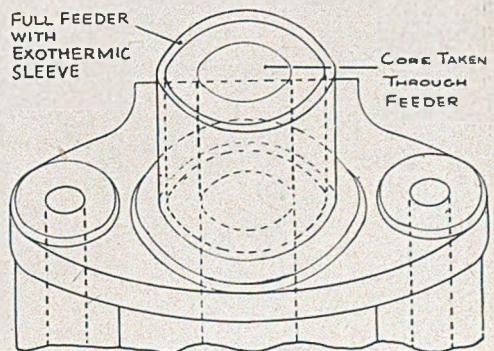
Fourth Method for Feeding the Tubetesting Cylinder, using a Full Feeder and Exothermic Sleeve surrounding the Core.
